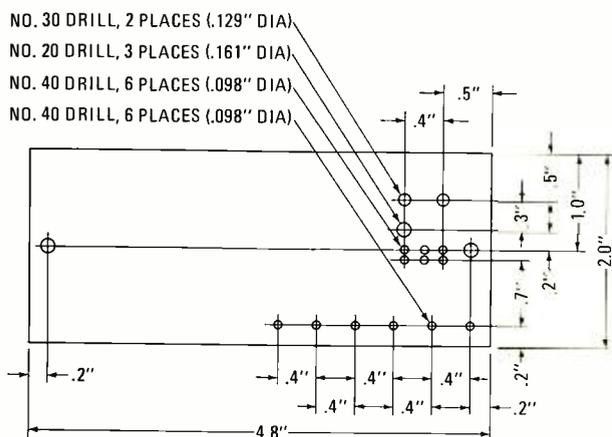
DRILLING GUIDE shows locations and sizes of the 17 holes that must be drilled in the perforated circuit board.
